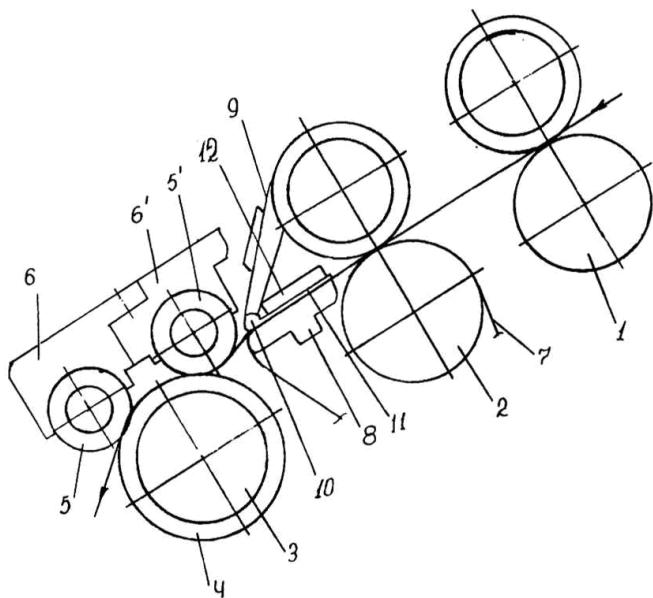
FIG.I. DOUBLE-BELT DRAFTING DEVICE
